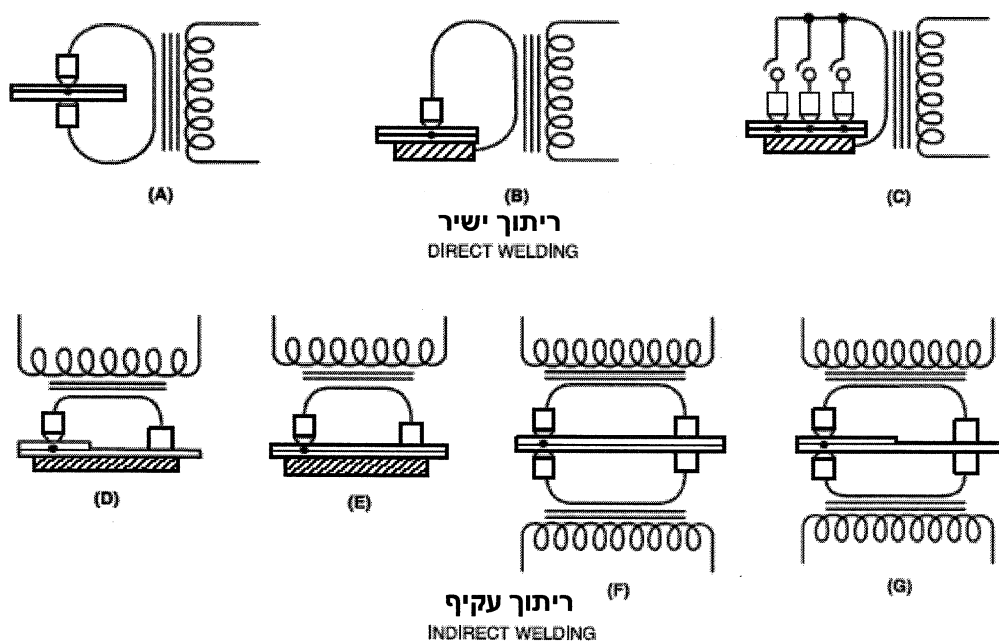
Typical Arrangements for Single Spot Welds
